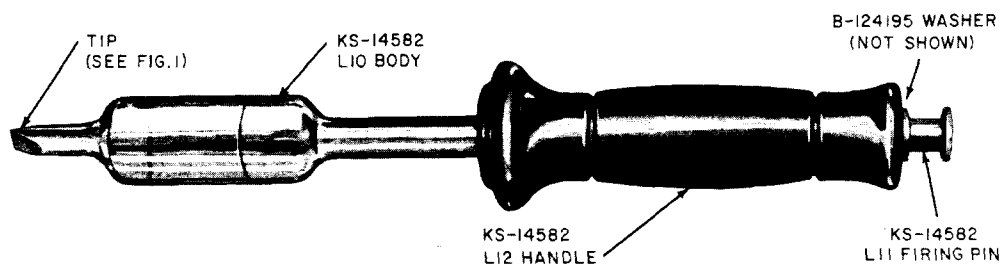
KS-14582 L1 Soldering Copper (Manufacture Discontinued)
